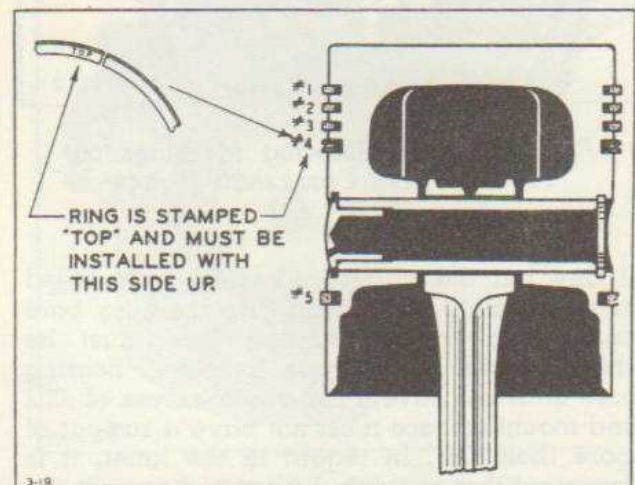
Sectional View Thru Piston Showing Piston Ring Arrangement
